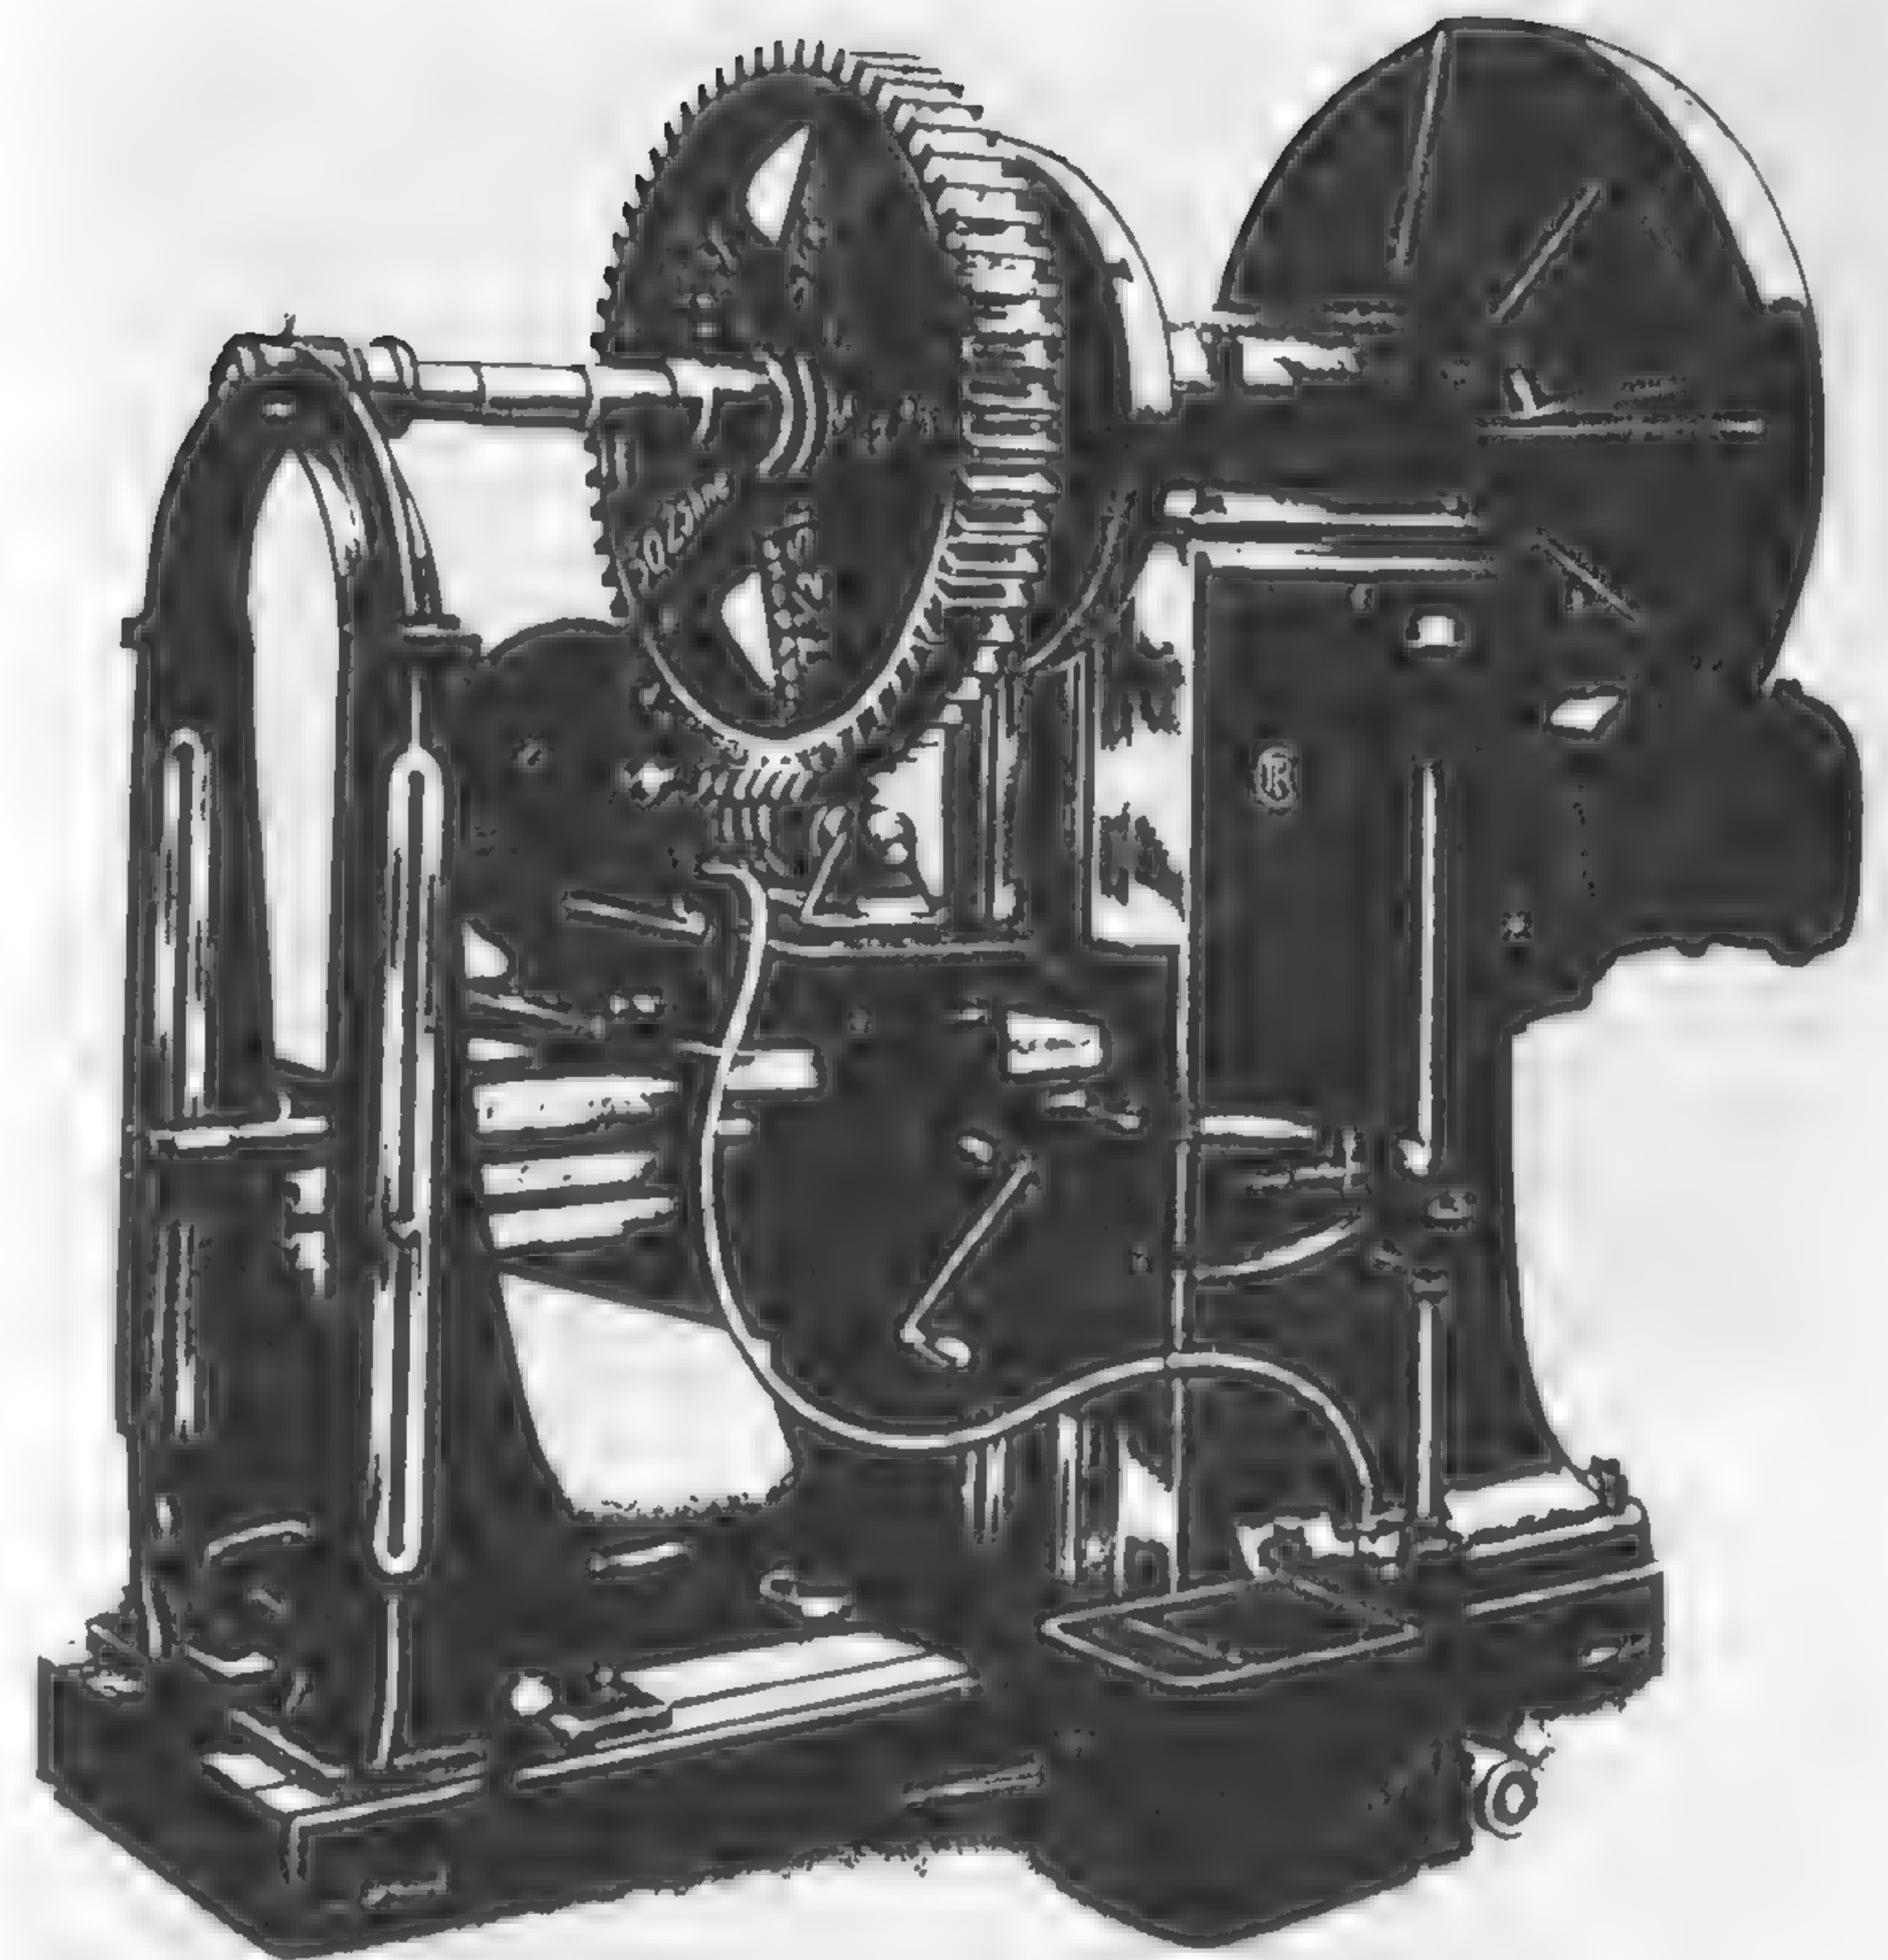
REINECKER SPUR-GEAR HOBGING MACHINE, 1894 (*Inst. Mech. Eng.*)
